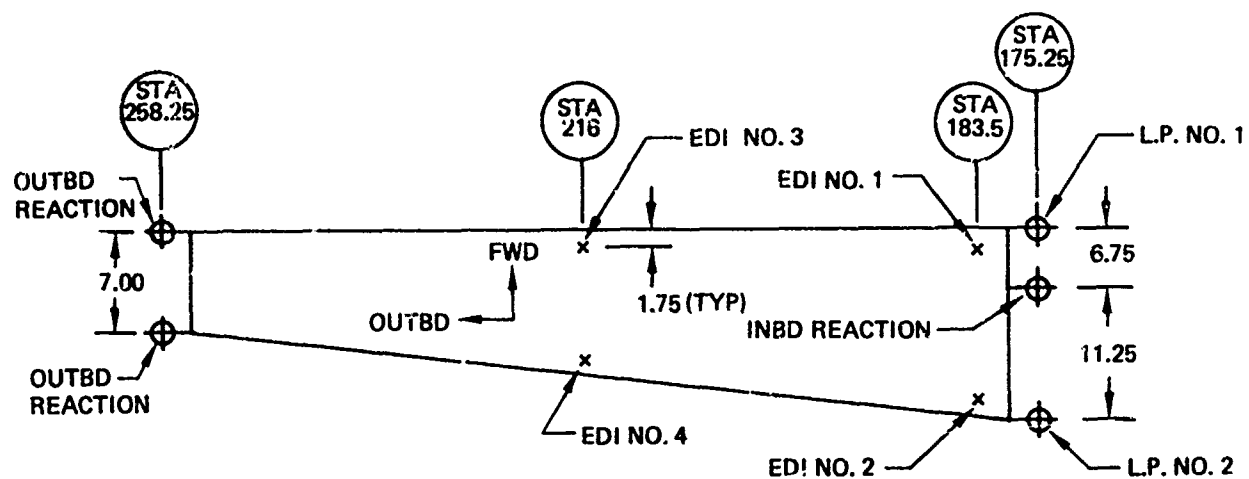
Load Point and EDI Locations GR/PKXA YC14 Elevator Box No. 3
